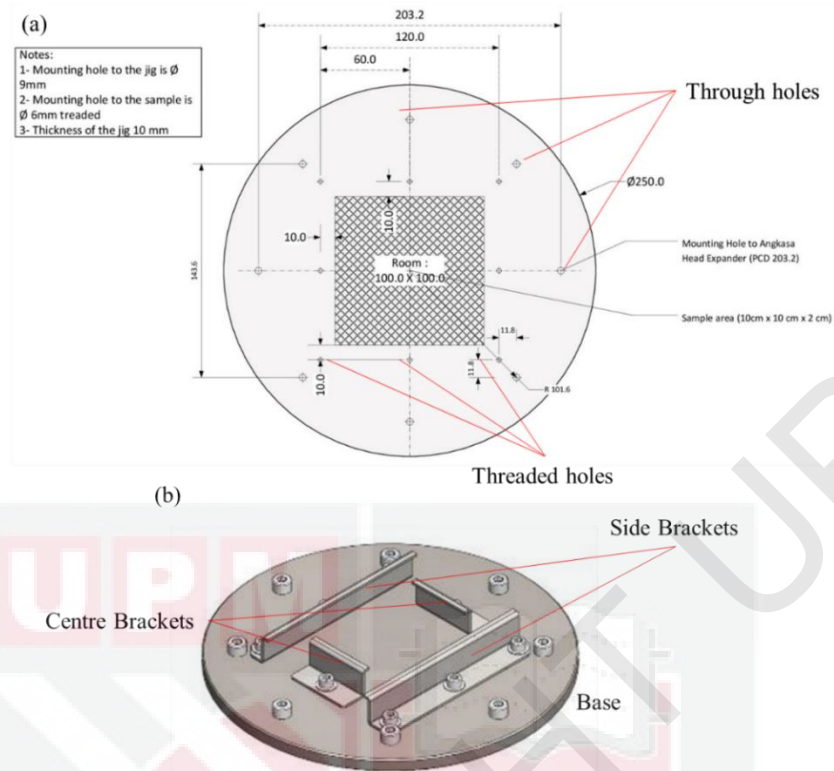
CAD drawing of vibration jig for random vibration test and static load test. (a) Top view, (b) orthographic view
